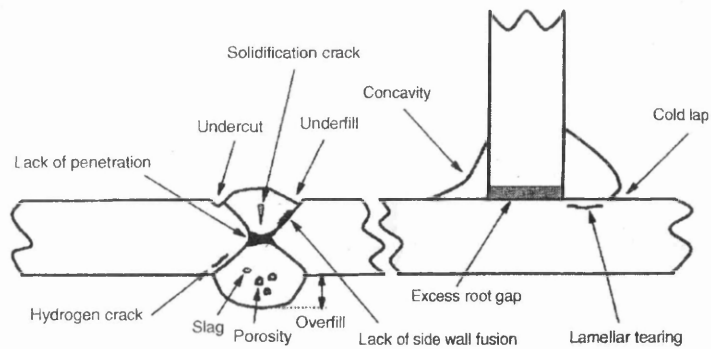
Typical Discontinuities in Welded Joints (Becker and Shipley 2002)
